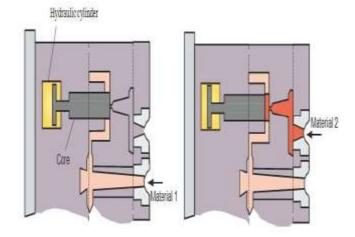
Schematic diagram of multicomponent injection molding using a core pull or a core back technique.
